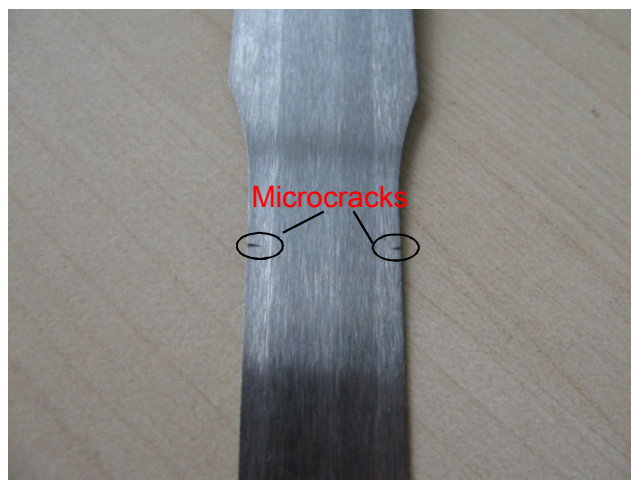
Microcracks appear on the surface of flat specimen after polishing.
